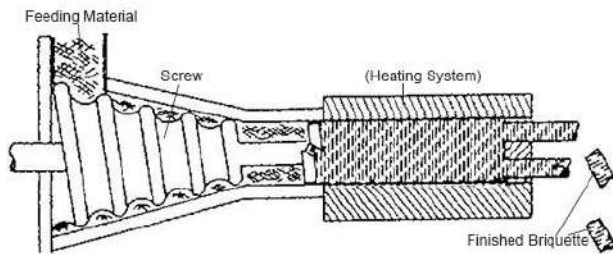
Screw pressing briquette machine (MaxTon Industrial Co. 2020).
